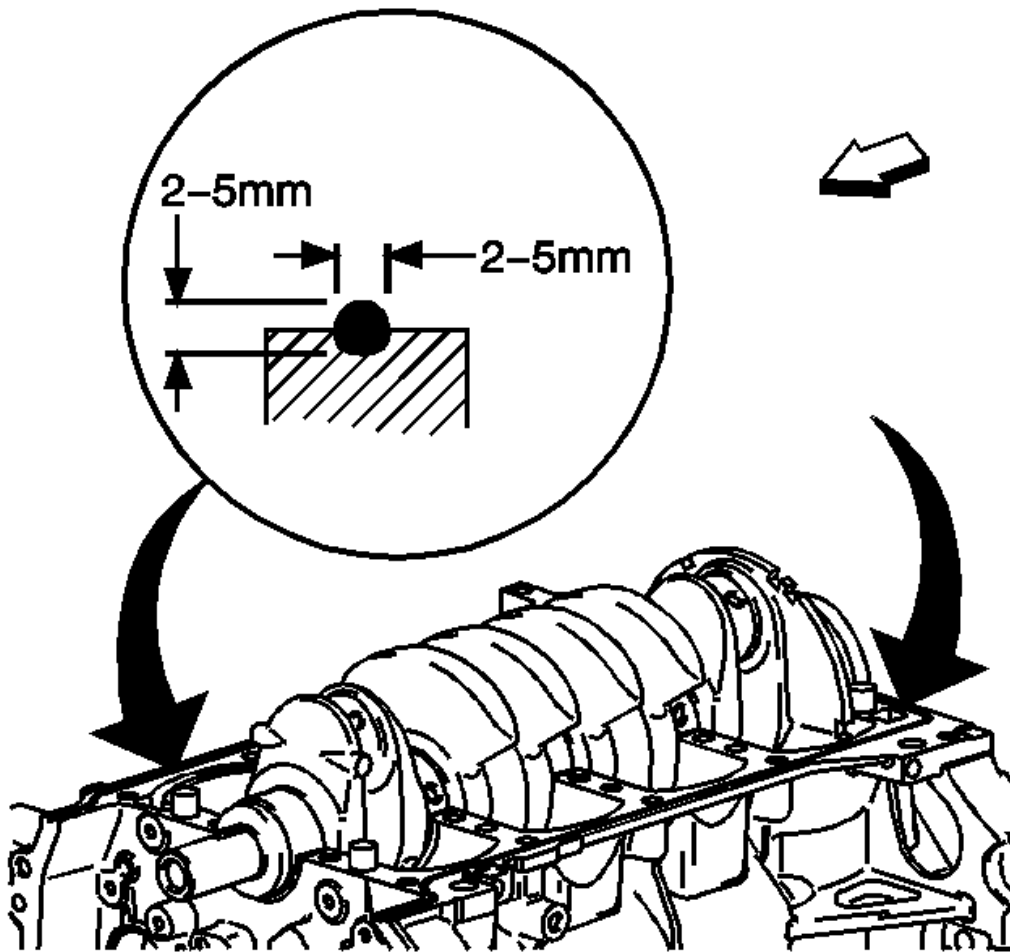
Applying of Sealant to Engine Block Surfaces & Bedplate Mating Surfaces
